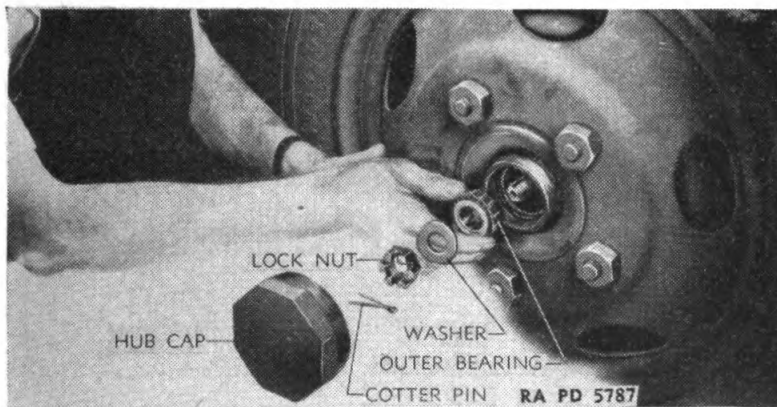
Disassembly for removal of brake drum and wheel.
